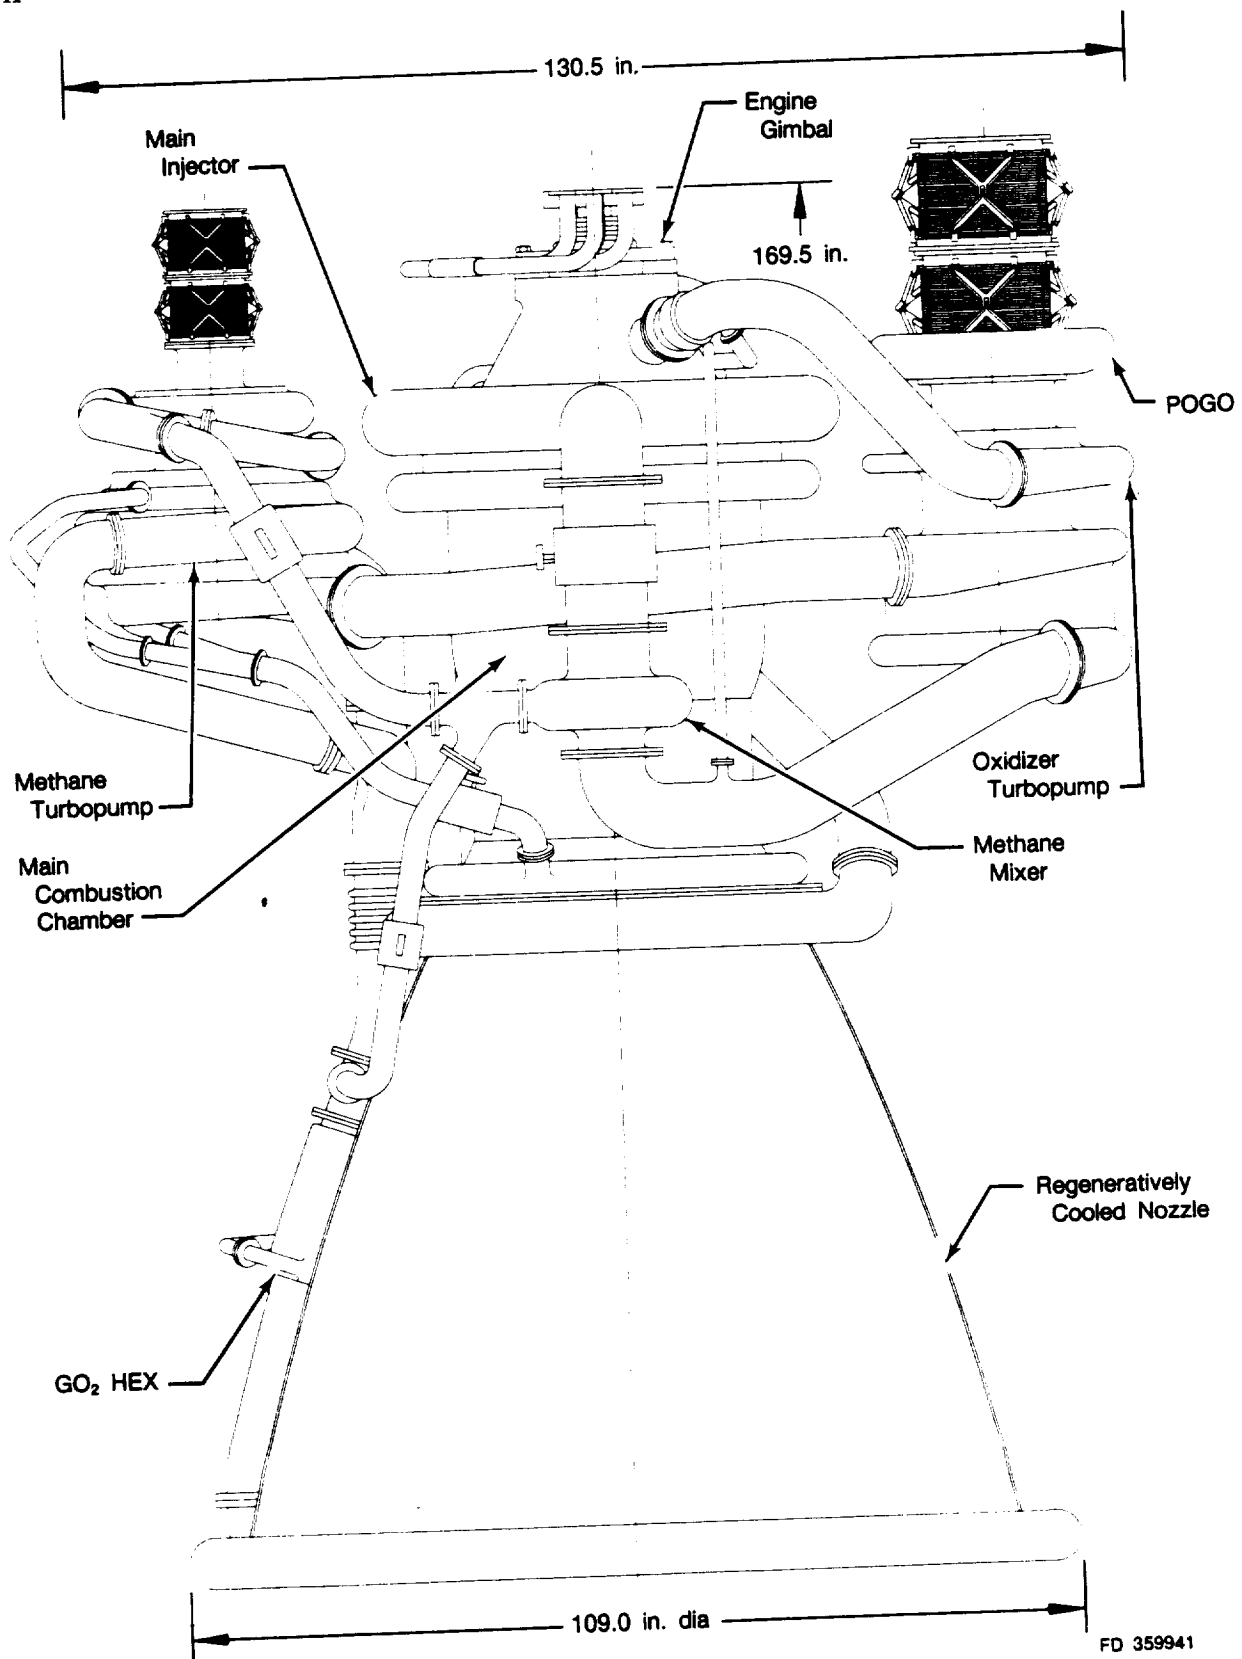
STBE Unique Split Expander Engine Assembly — Side View
